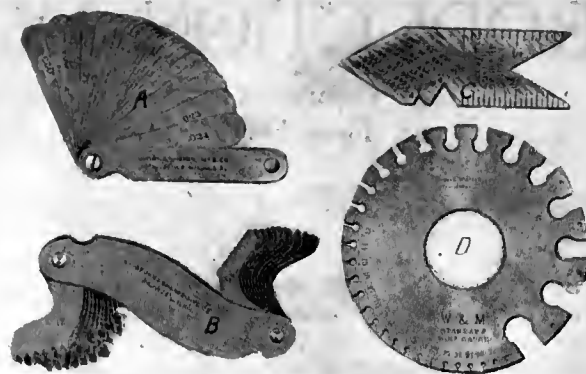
(a)—FEELER OR THICKNESS GAUGE; (b)—THREAD GAUGE; (c)—CENTRE GAUGE; (d)—WIRE GAUGE.
